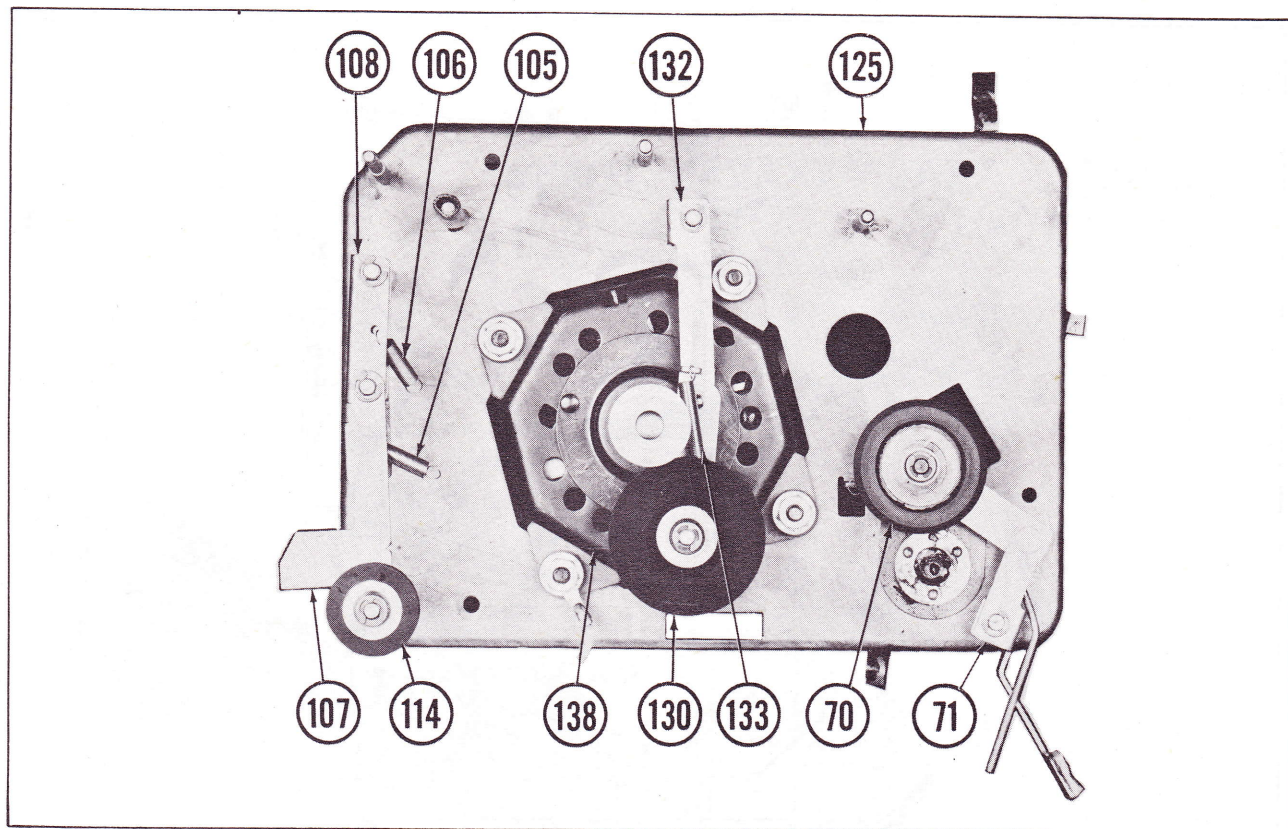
MOTOR MOUNTING PLATE & DRIVE IDLERS ASSEMBLY.
